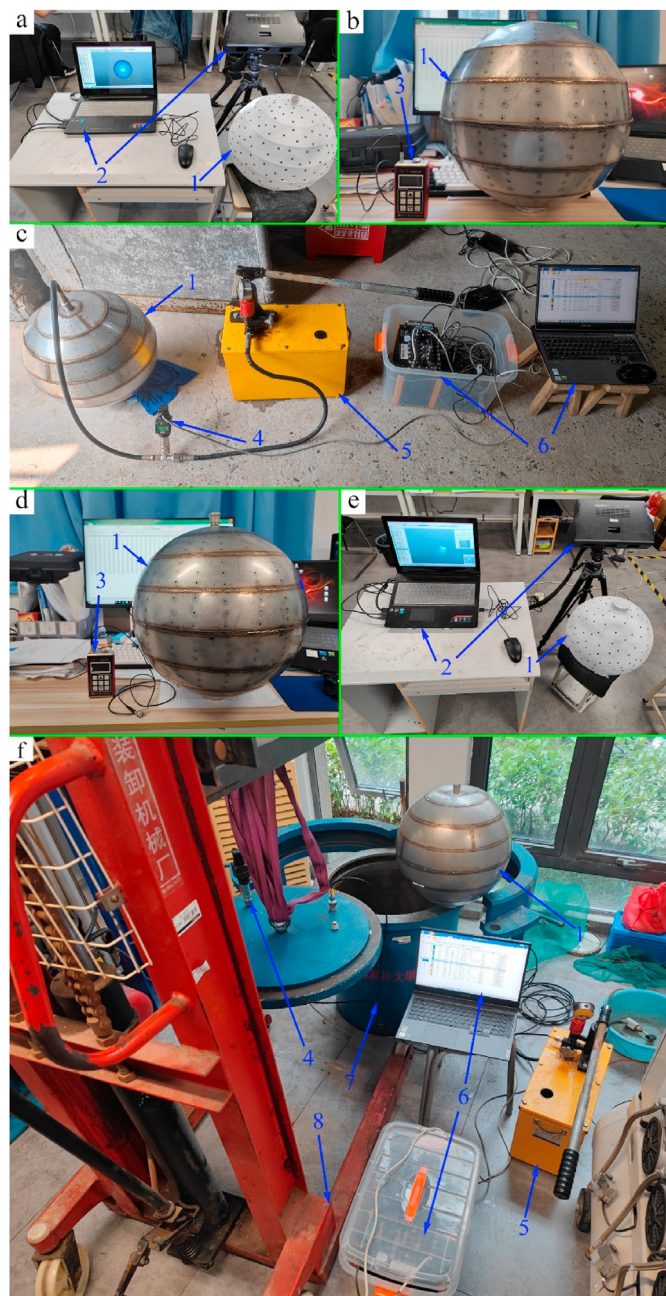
Experimental procedures conducted on the (a–c) longan-shaped polyhedral preform and (d–f) longan-shaped pressure hull: a = shape measurement, b = thickness measurement, c = dieless bulging, d = thickness measurement, e = shape measurement, and f = buckling test.
